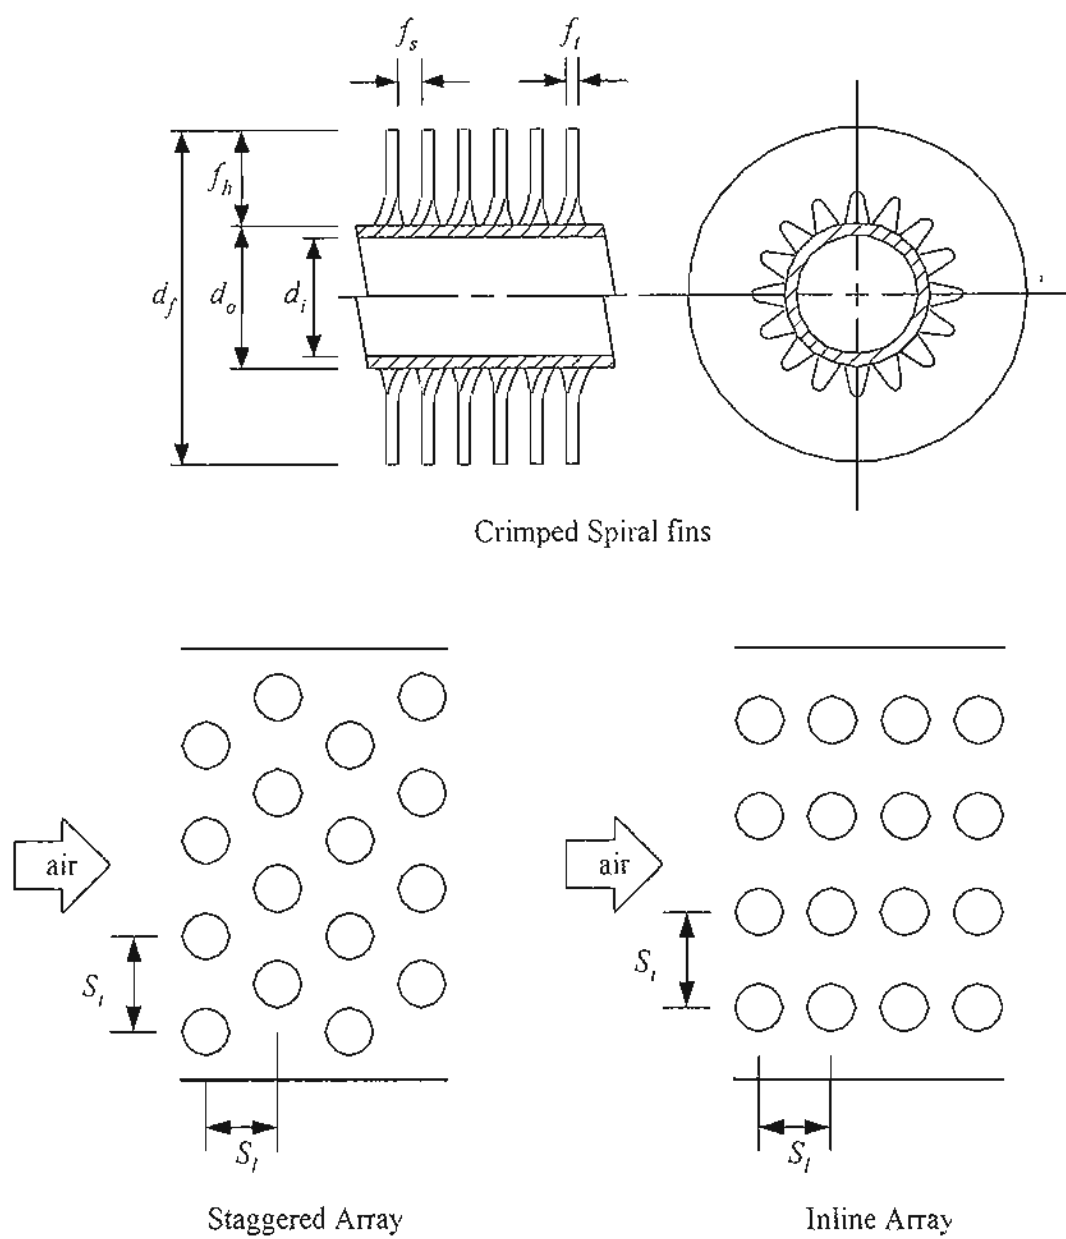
Details of crimped spiral fins geometry and tube arrangements.
